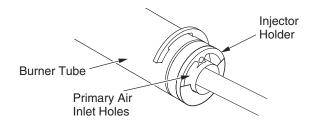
Injector Holder On Outlet Burner Tube - Rear Burner
